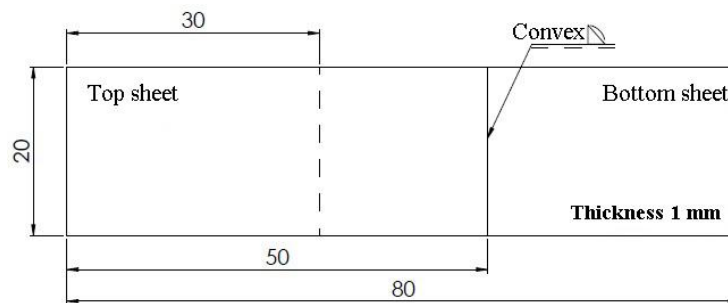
A photo illustrating dimensions of CMT-welded specimen tested in salt chamber.
